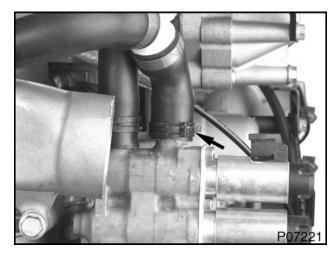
Charge Air Cooler (CAC) supply coolant pipe
